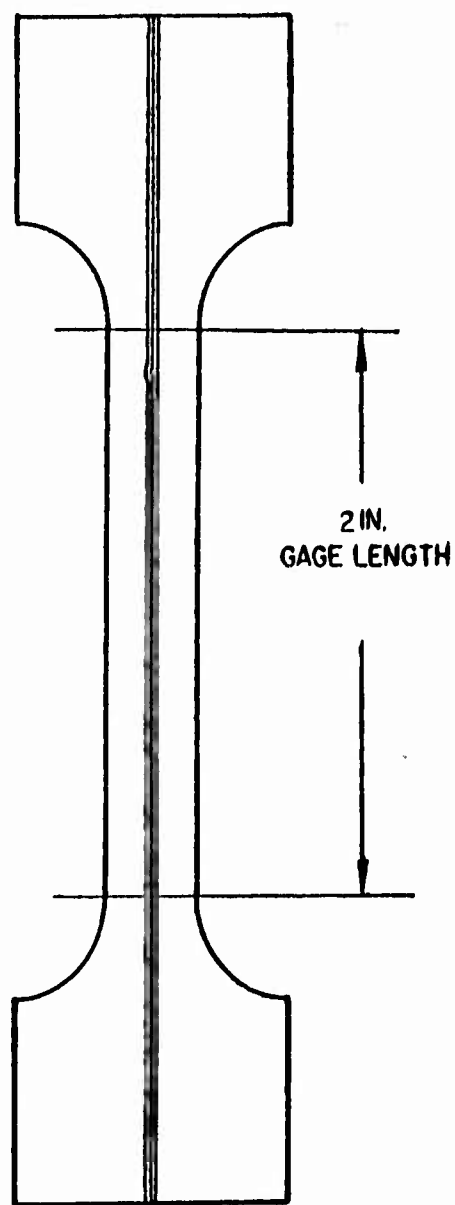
Typical Reinforced Epoxy Dumbbell Specimen
